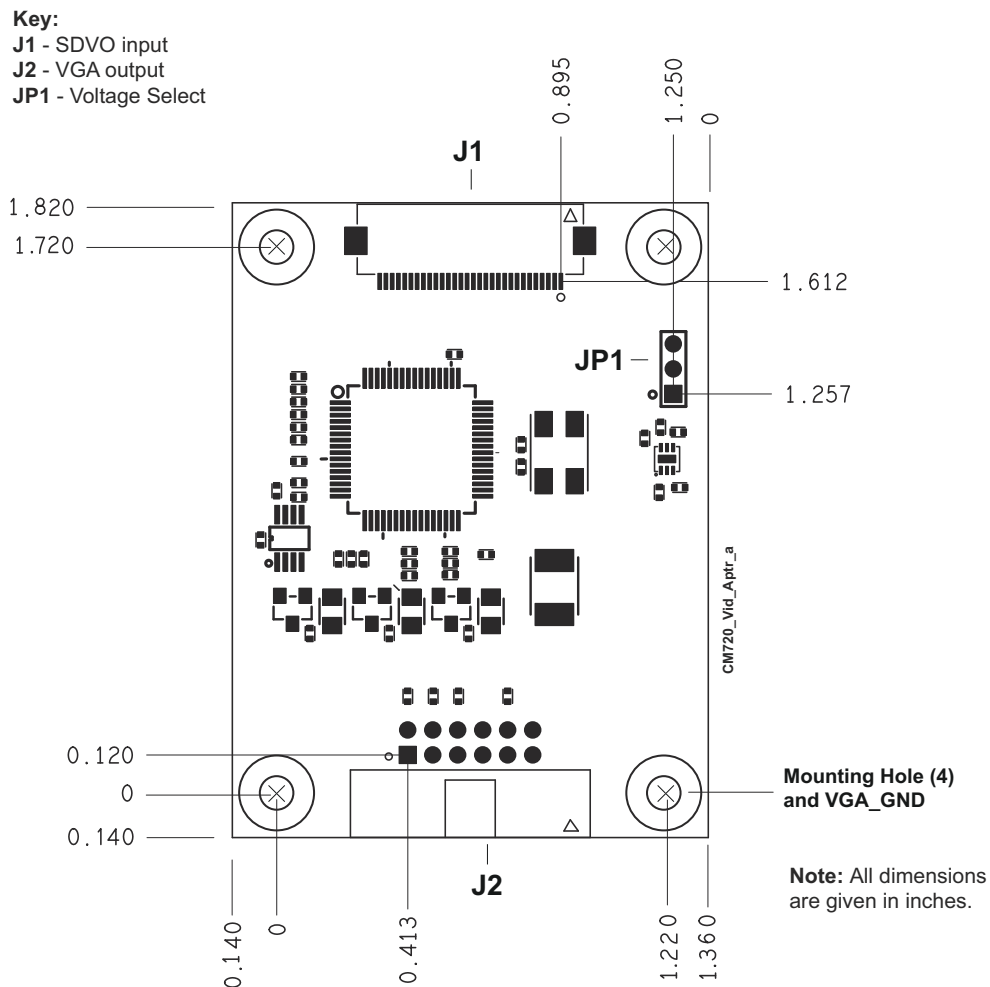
Adapter Board Headers and Dimensions (Top Side)
